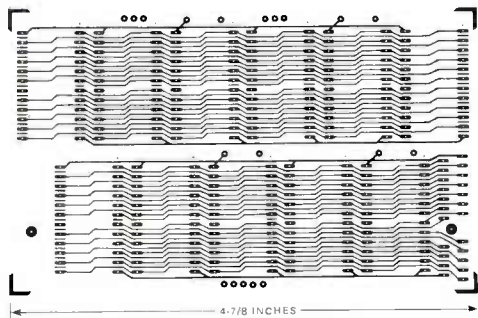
THE FOIL PATTERN for the reverse side of the memory board is shown here half size.
